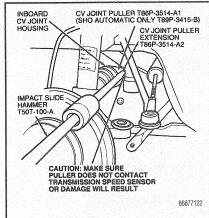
Installing the specified tools to remove the halfshaft assembly from the vehicle
